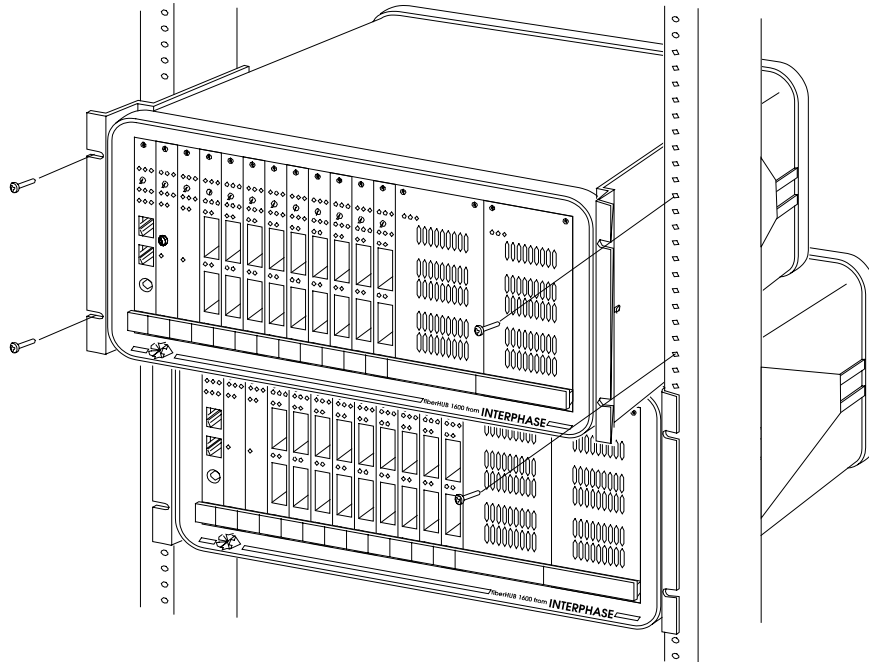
Mounting the Concentrator in a Flush Mount Position
